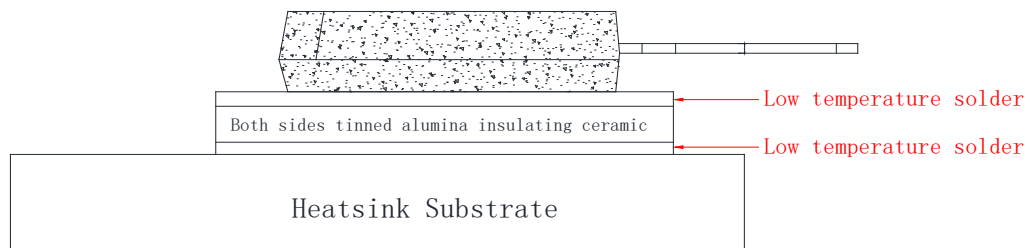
Soldering the heatsink substrate, the insulating ceramic sheet and device
